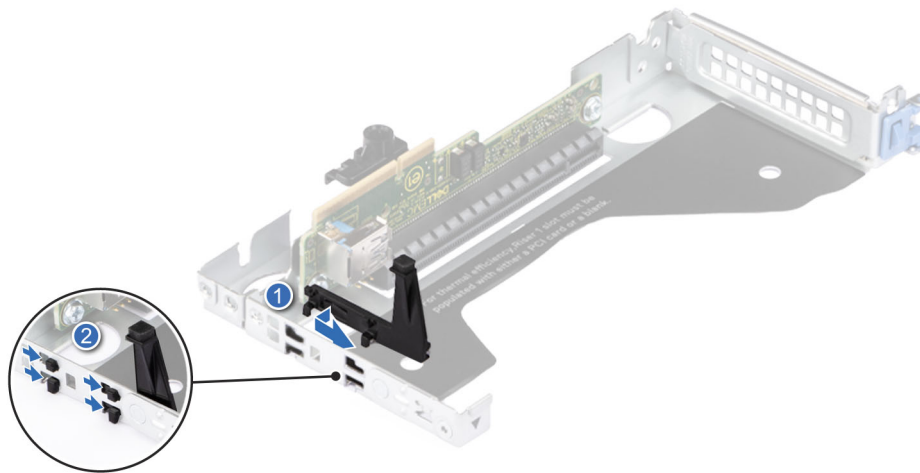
Installing the expansion card holder on riser 1 for full-height expansion cards
